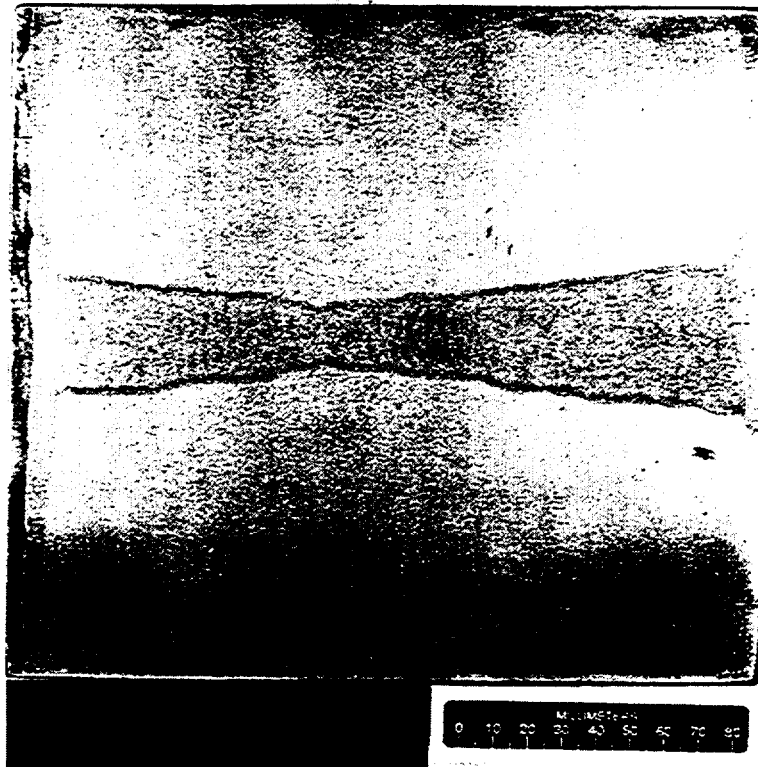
Beltline weld, showing double-V weld of submerged-arc layered WF-70 weld metal on both sides.
